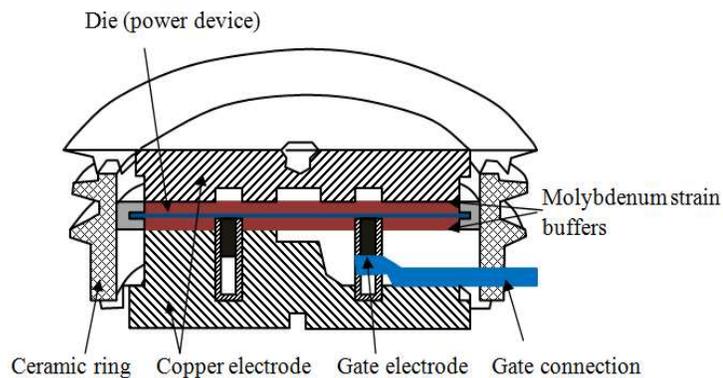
Schematic drawing of IGBT packaging by press-pack
